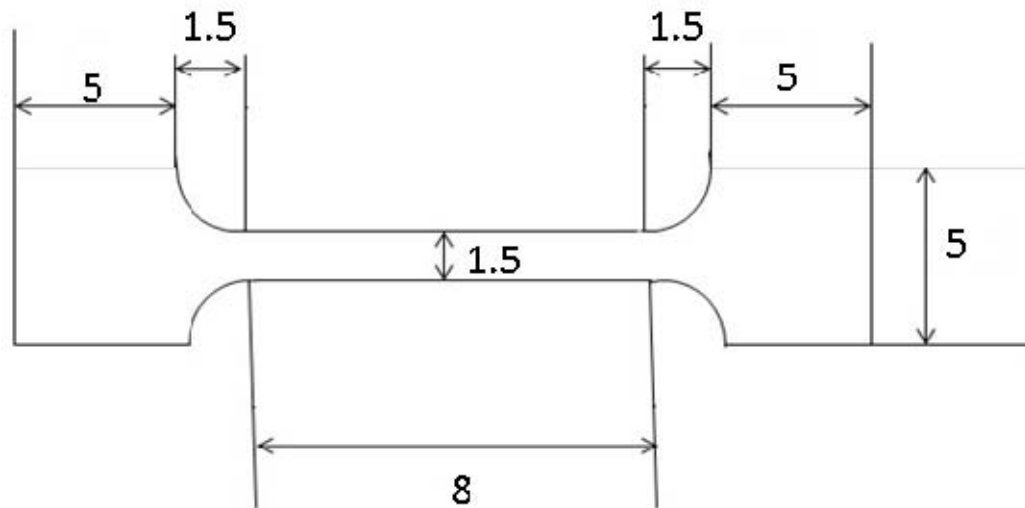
Schematic of the tensile test specimens (all dimensions shown are in mm).
